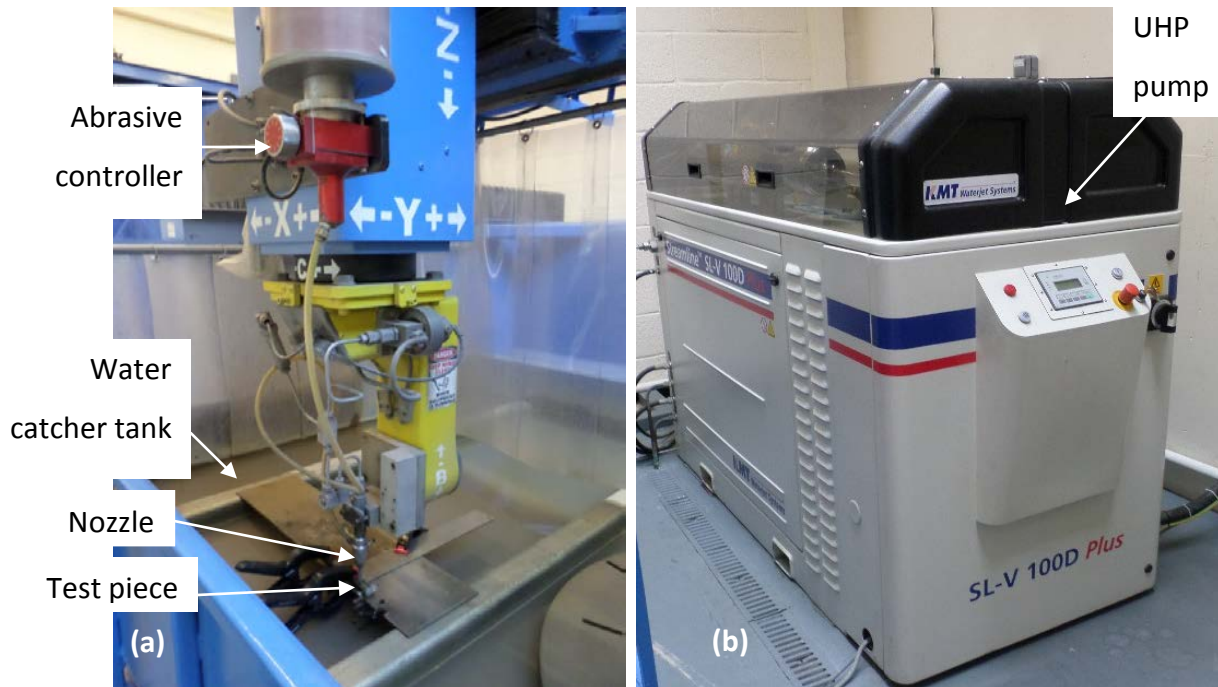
7: AWJC Equipment (a) AWJC machine (b) UHP pump
